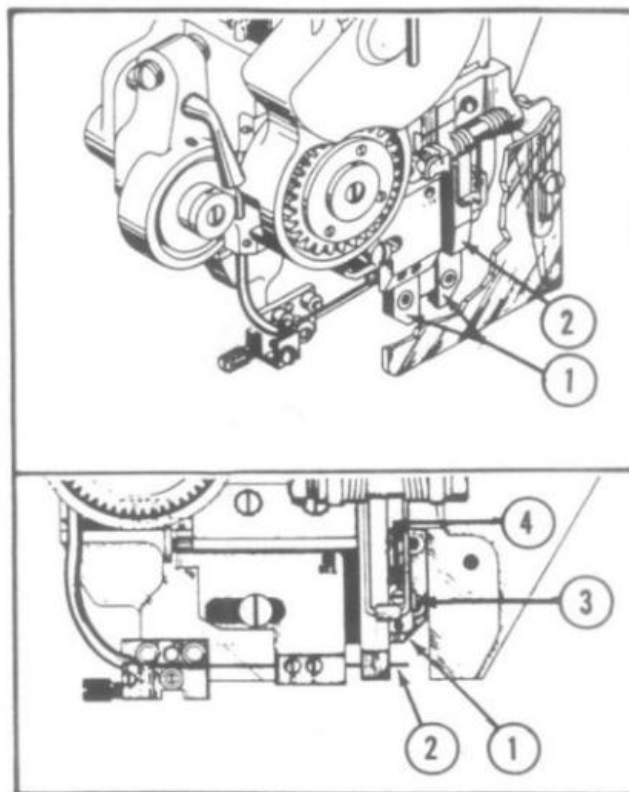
Adjustments for Aligning Gripper Bar and Formers
